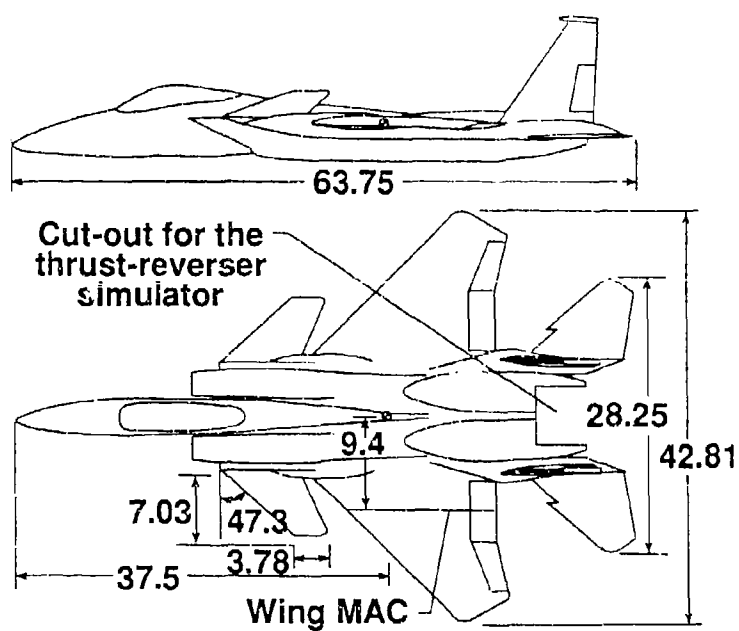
Sketch of the LF-15 S/MTD model tested. Dimensions in inches.
